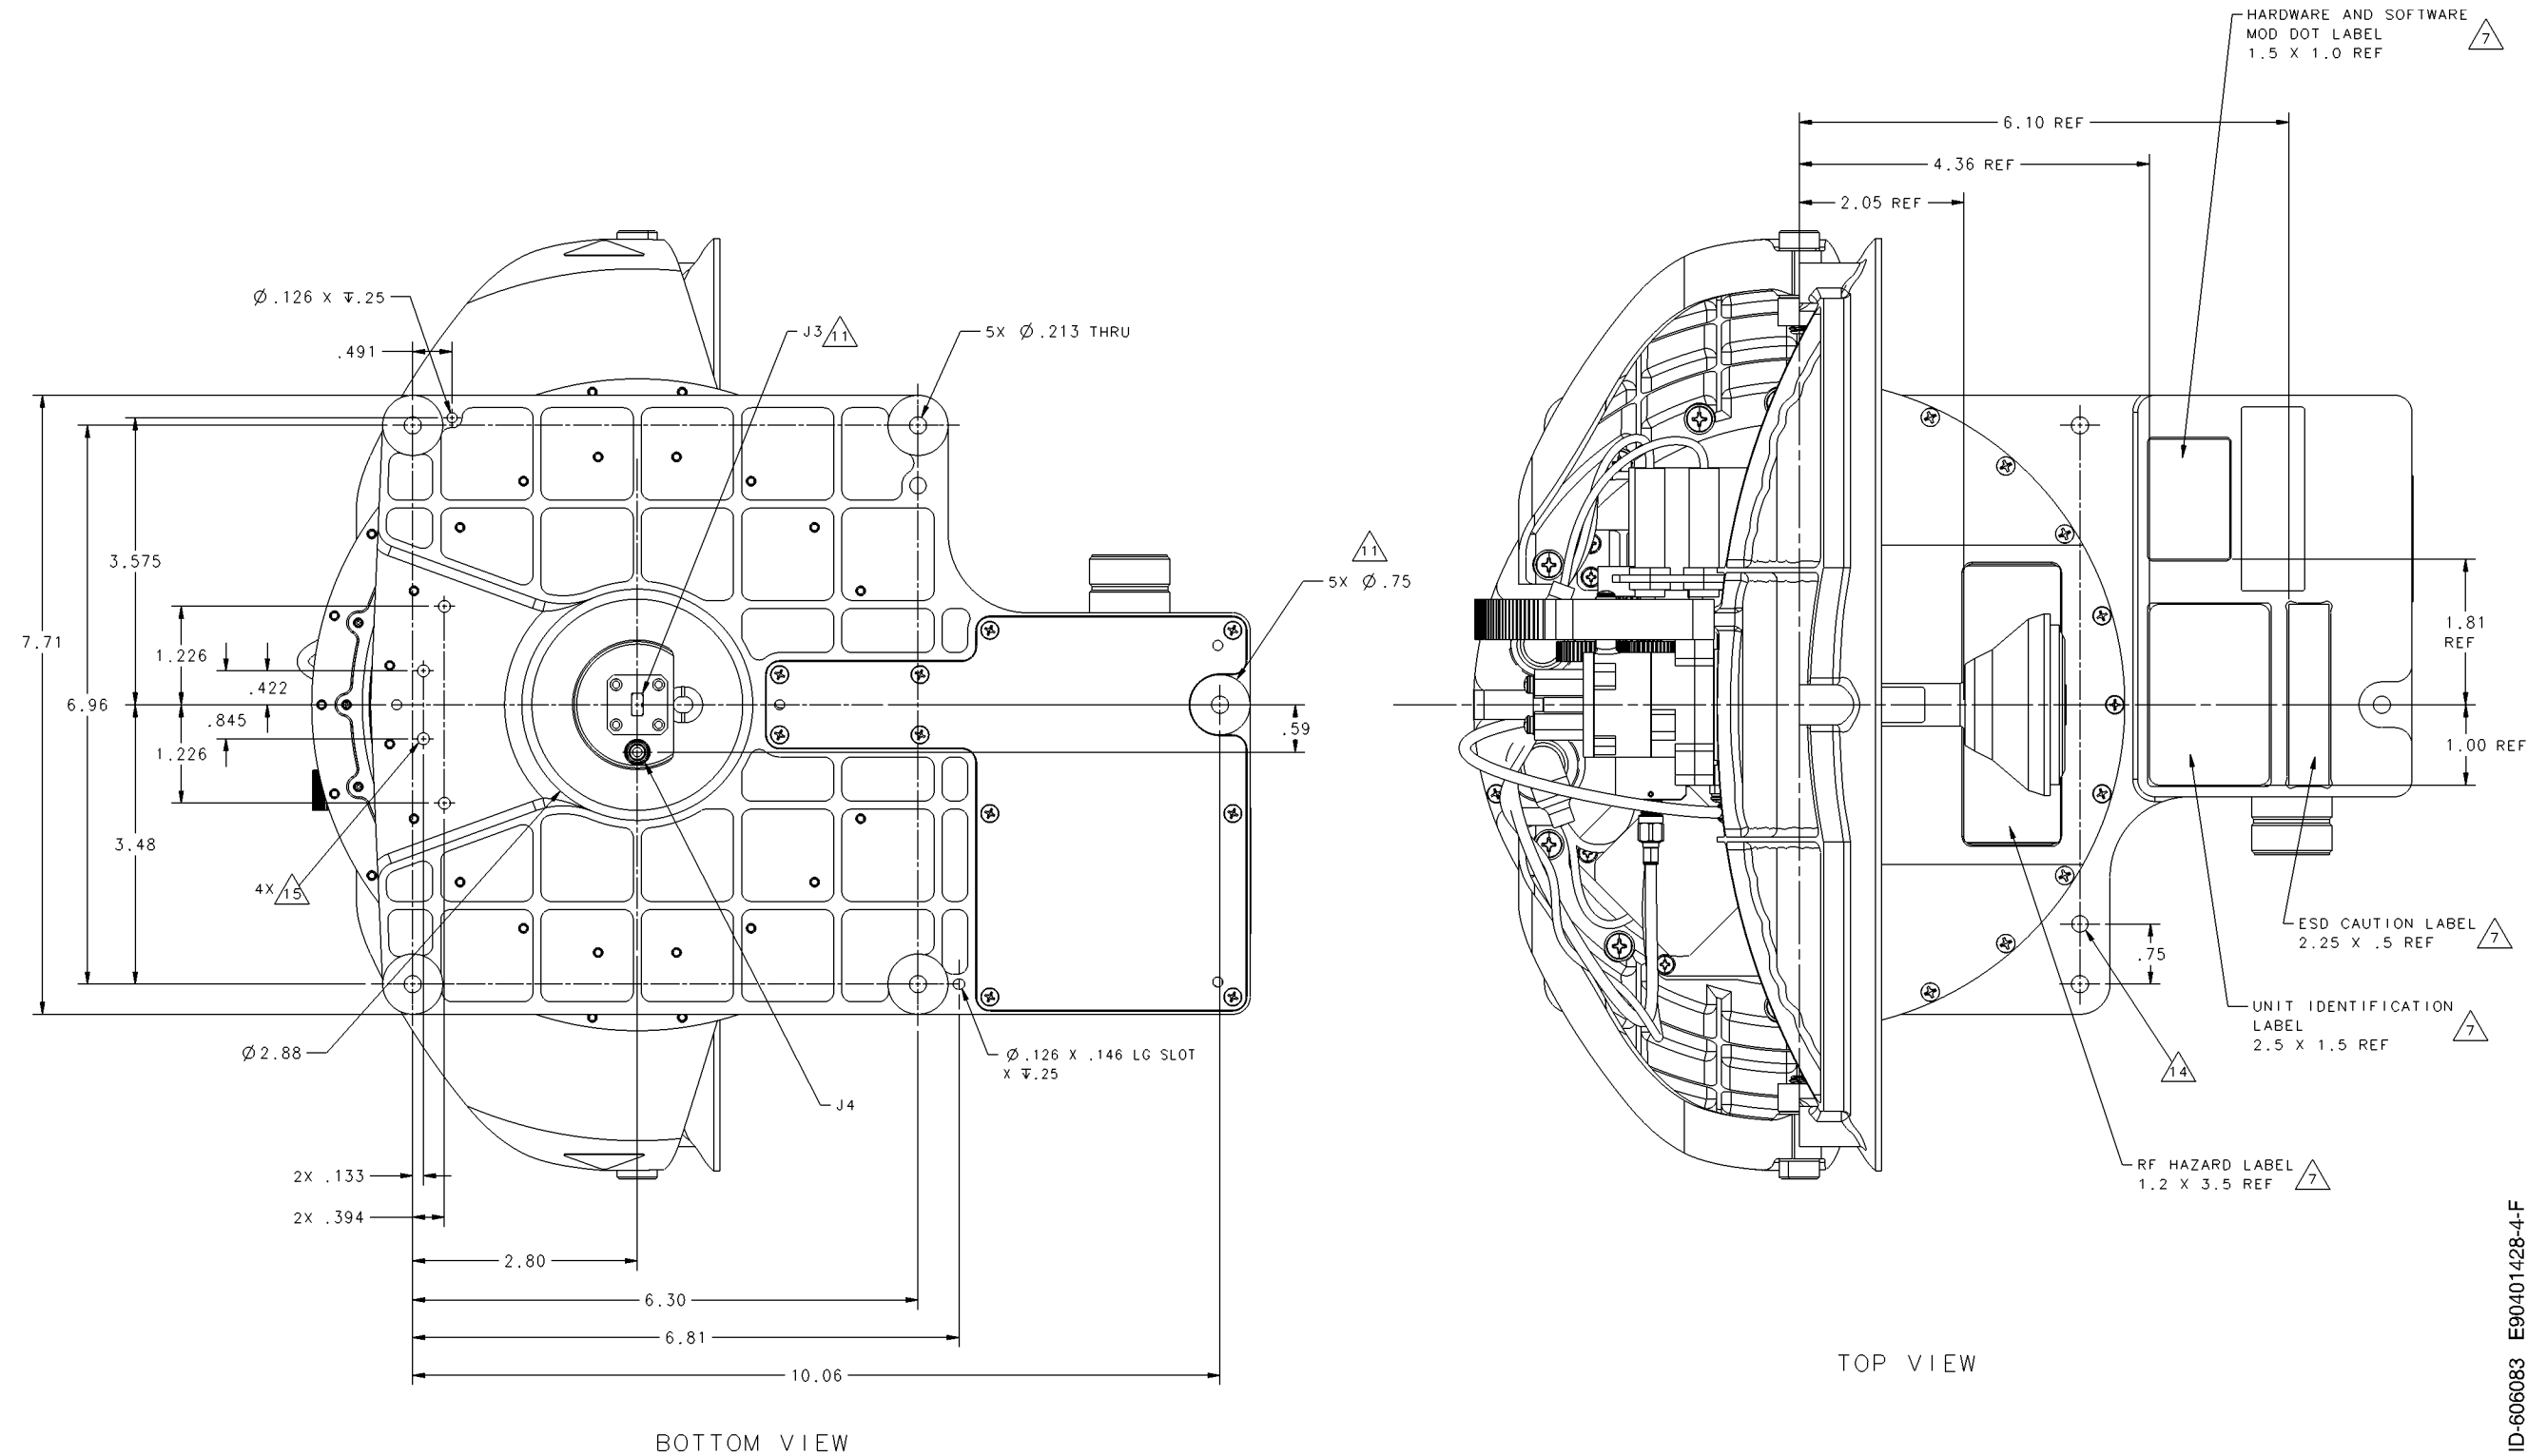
(Sheet 4 of 4) TMA Outline and Installation Drawing (90401428, REV F)
